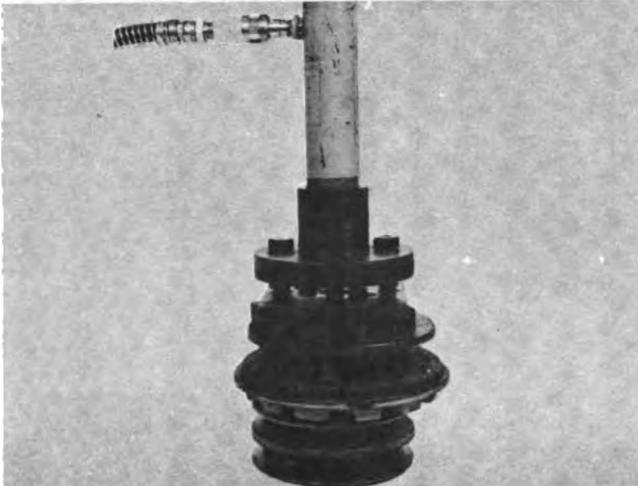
(UW101). Using A Puller To Remove The Impeller.
